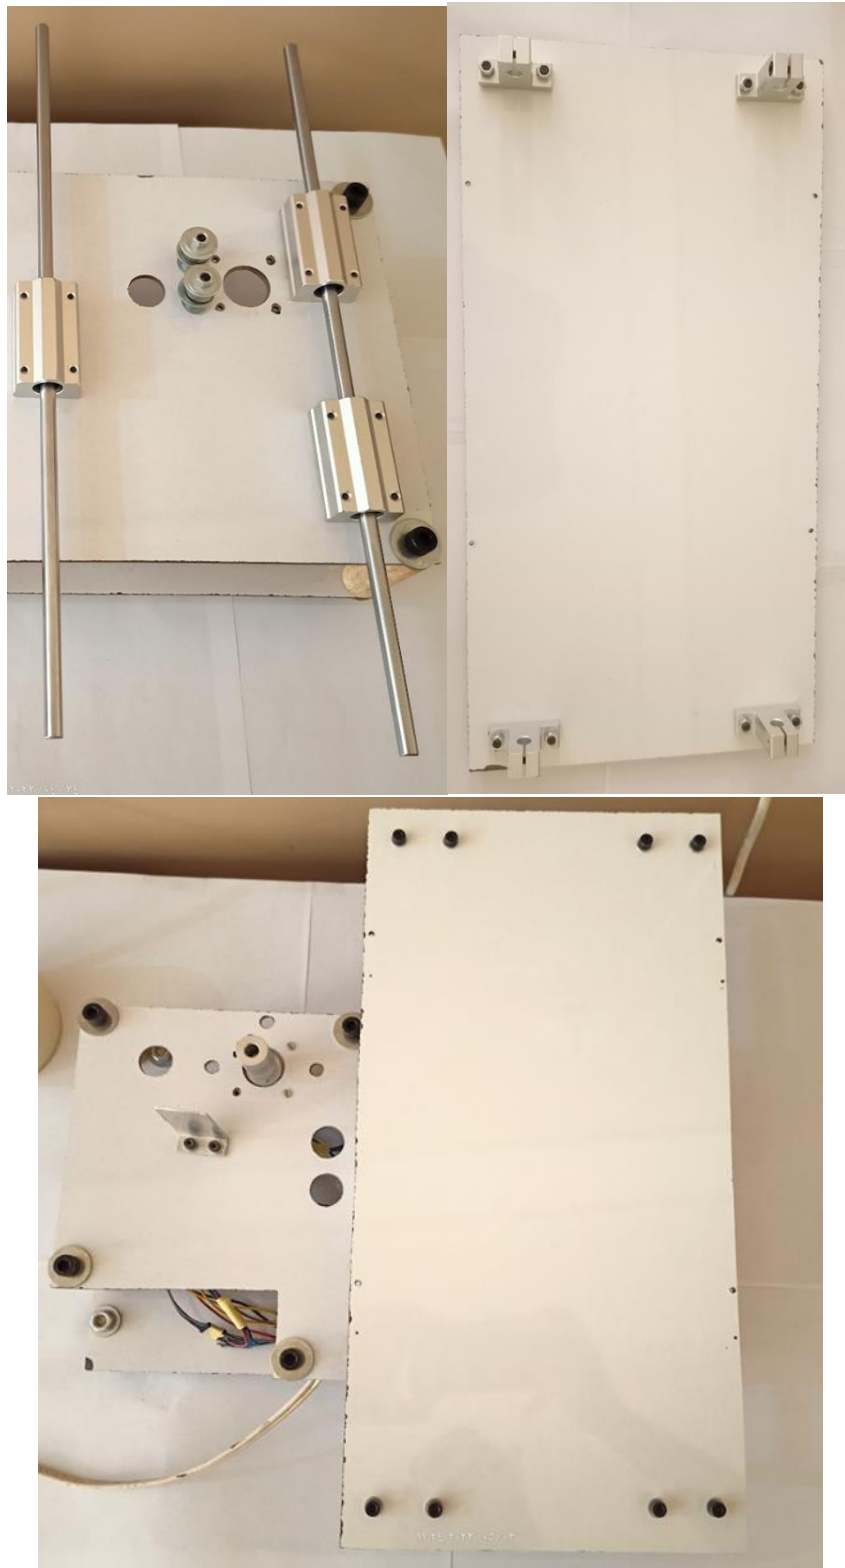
Top view of the Y axis after it is installed on the base of the printer
